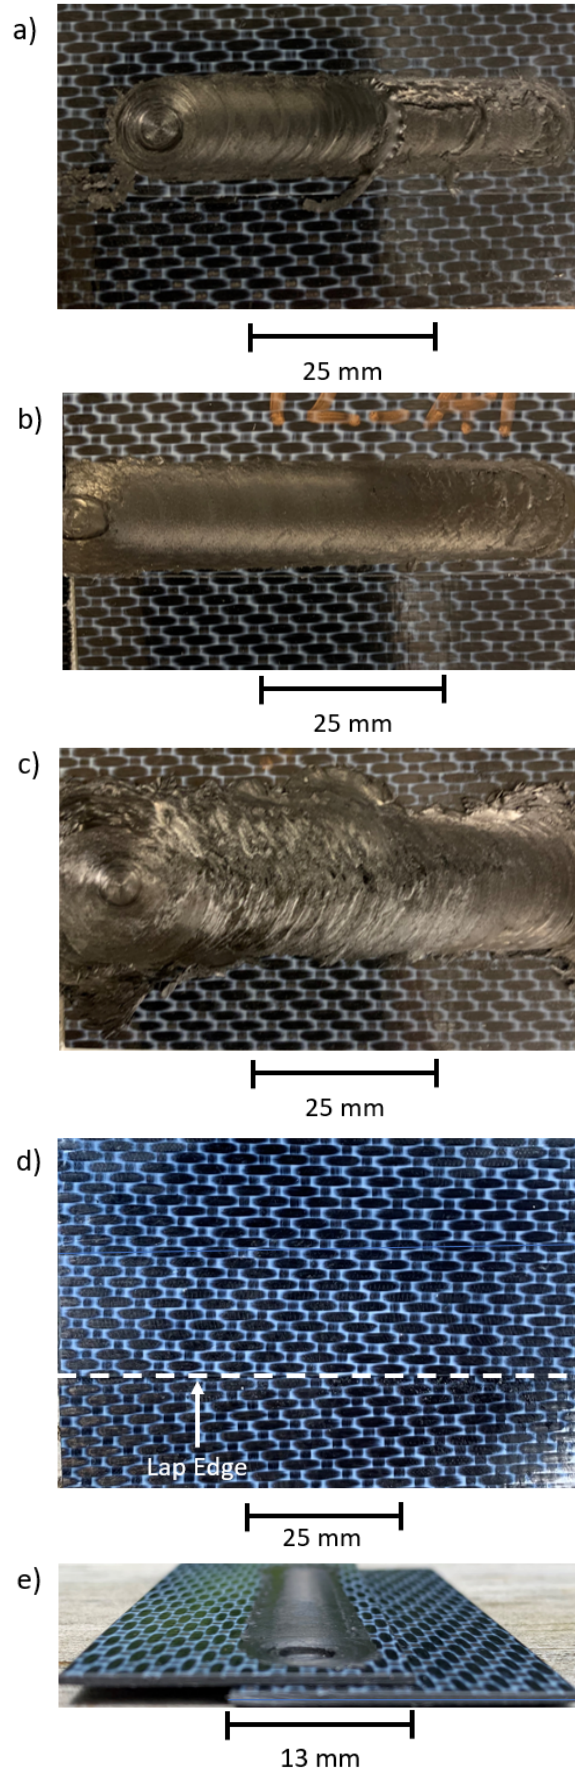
Typical surface appearance of selected welds. a) 800 RPM b) 1000 RPM c) 1800 RPM d) Bottom view e) End view
